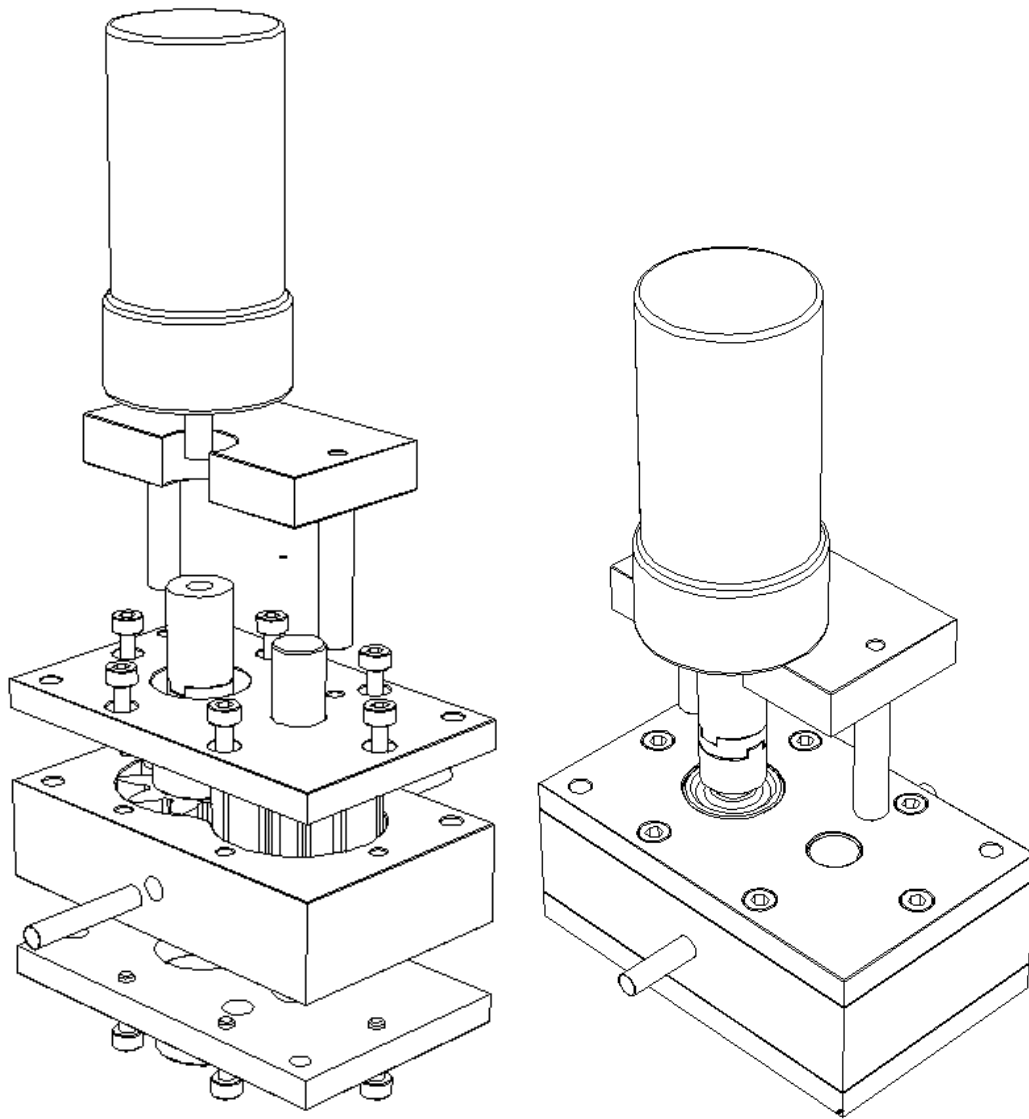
Isometric views of the large gear pump used in the SPARCLE instrument.
